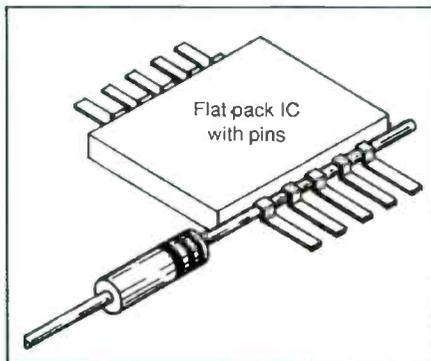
Passing a heavy resistor or capacitor lead under the pins on one side of the IC package will allow you to cut the leads without damaging the PC board.
